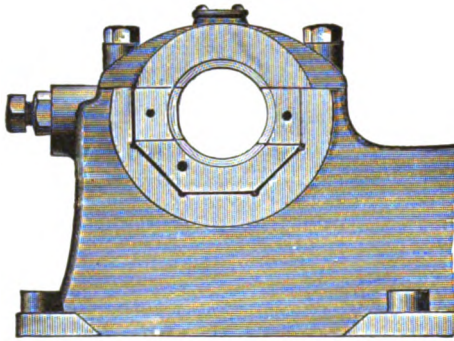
Crank-shaft Bearing of the Houston, Stanwood & Gamble Engine.
